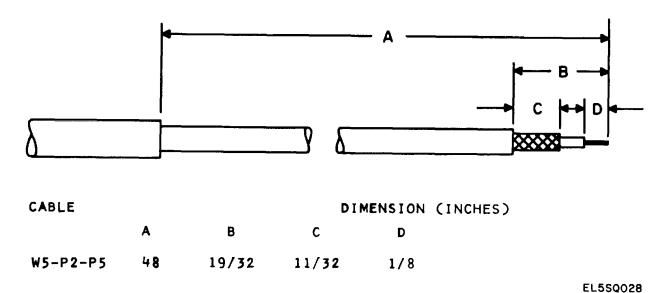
Stripping Details, Cable !A1W5P2 through P5.
